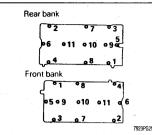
Rocker cover bolt torque sequence-3.0L DOHC engine
